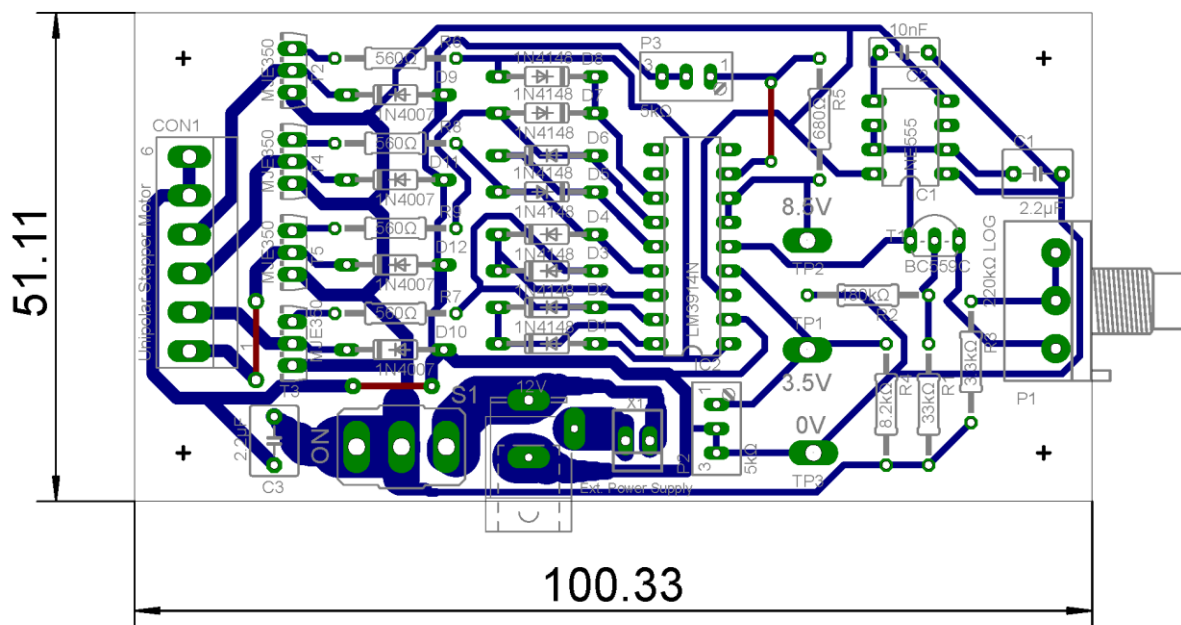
PCB picture from the CAD program. Dimensions are in millimeters.
